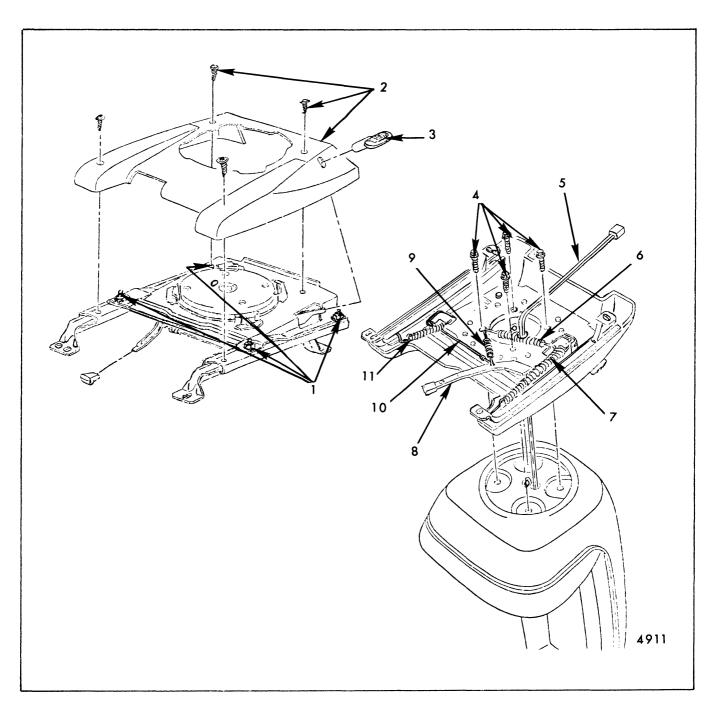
Swivel Shell Bucket Seat, Swivel and Adjuster Cover, Swivel Assembly and Adjuster Assembly
